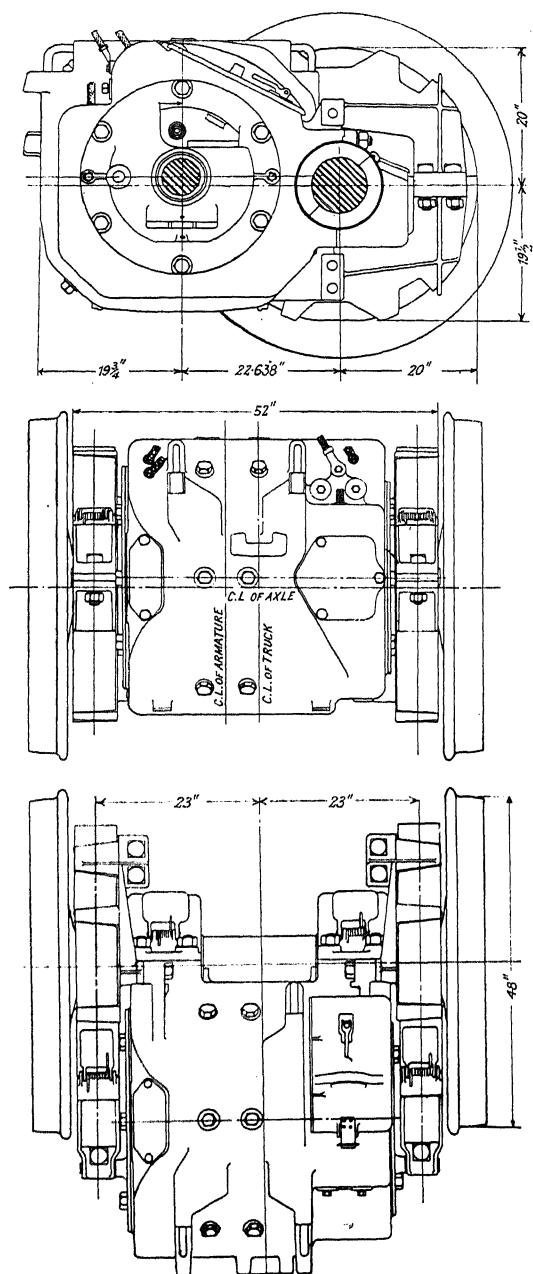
Assembly Drawing of Twin-Gear Motor.
